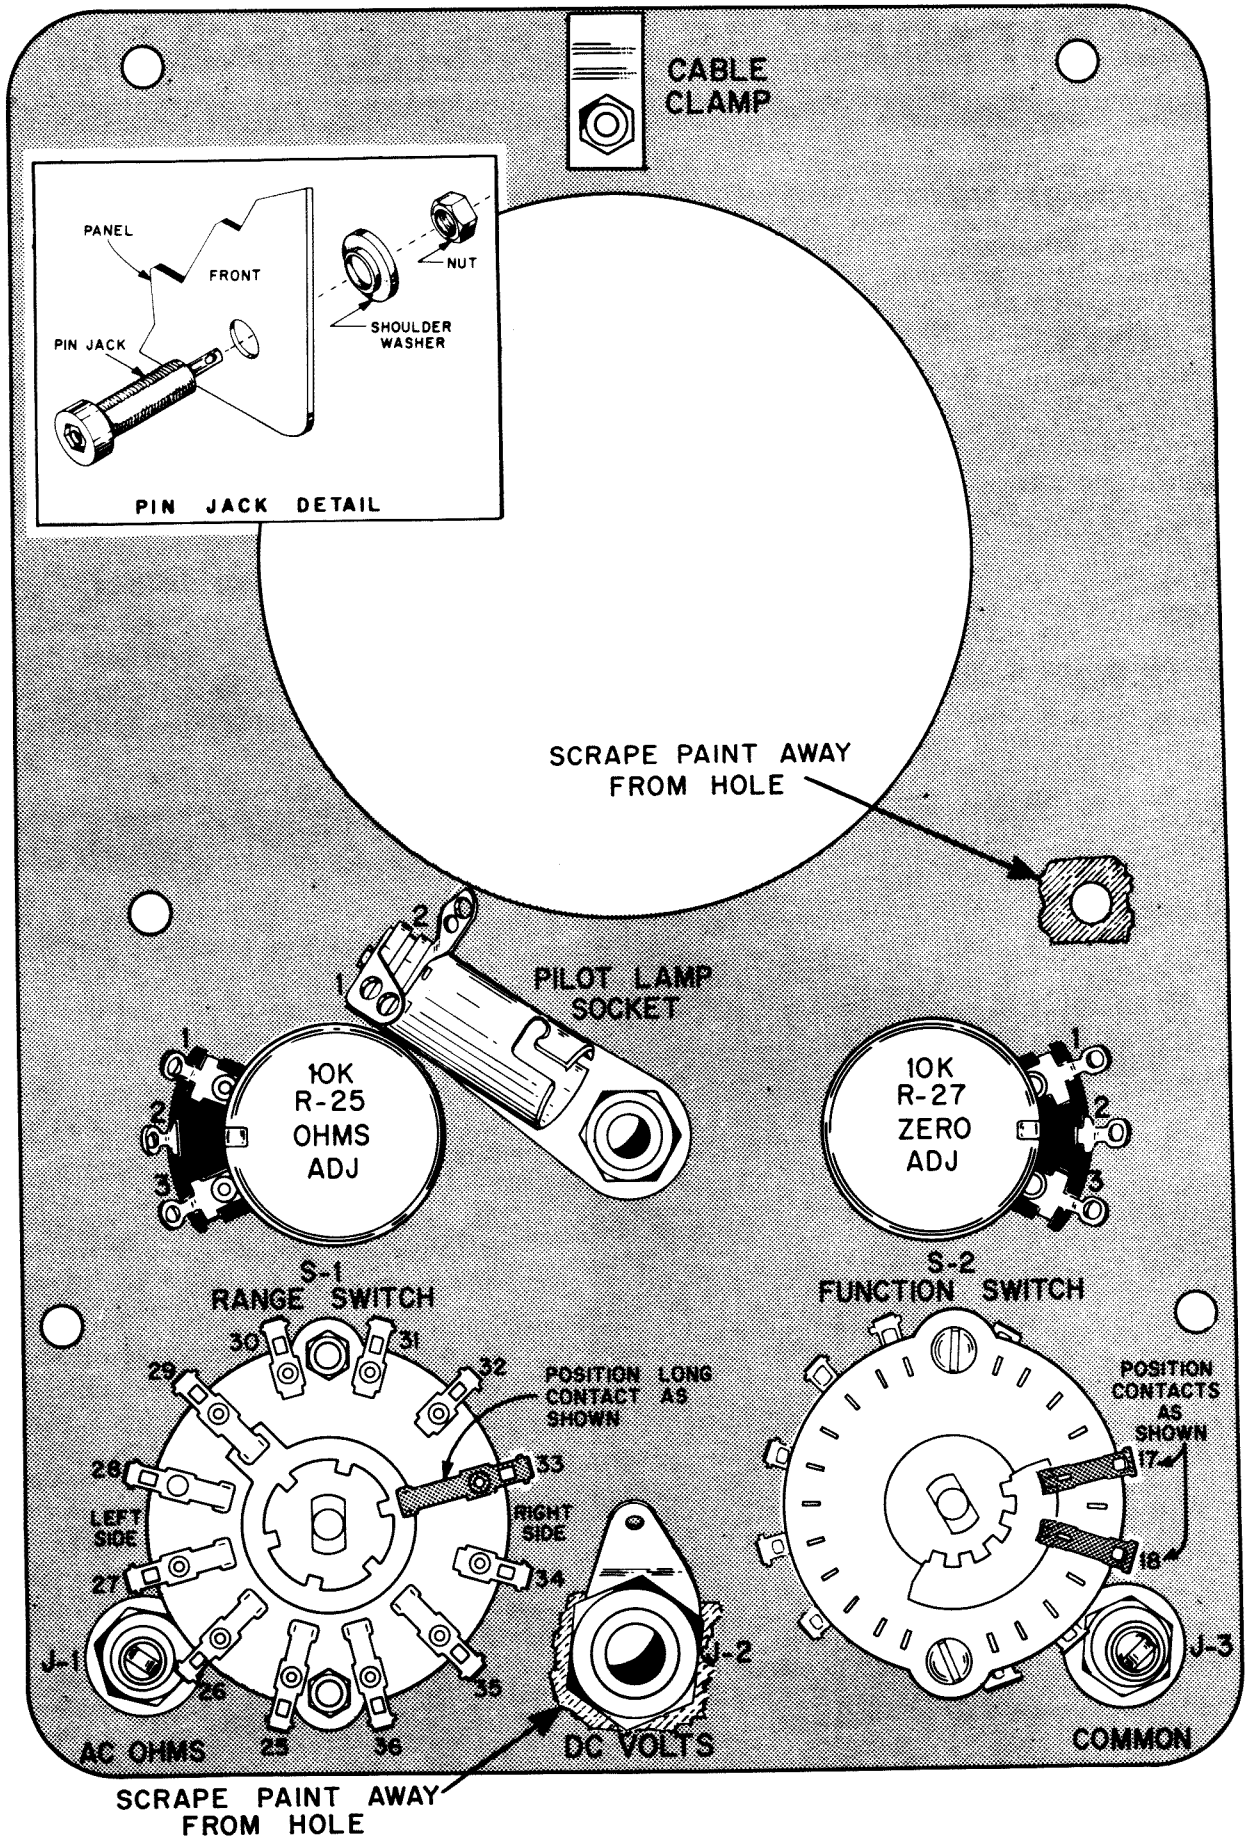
MOUNTING THE PARTS ON THE PANEL
